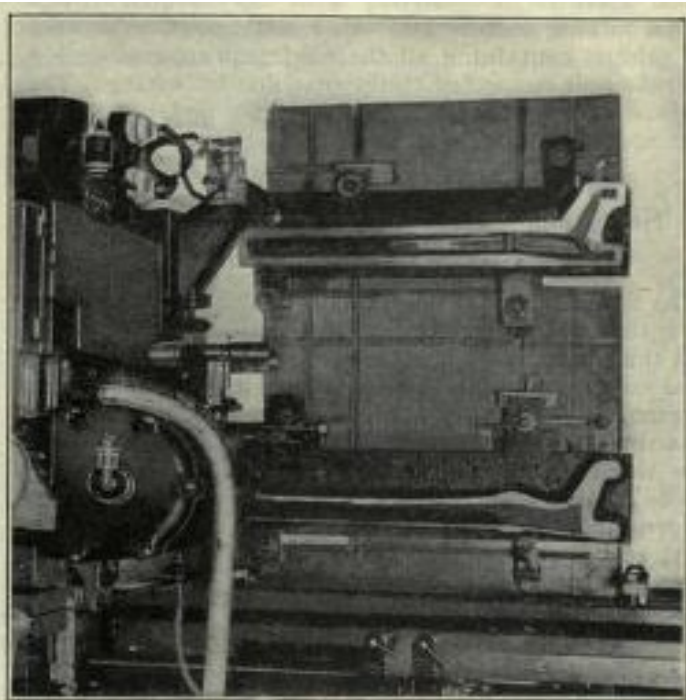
WORK AND MASTER ON KELLER TYPE F MACHINE
